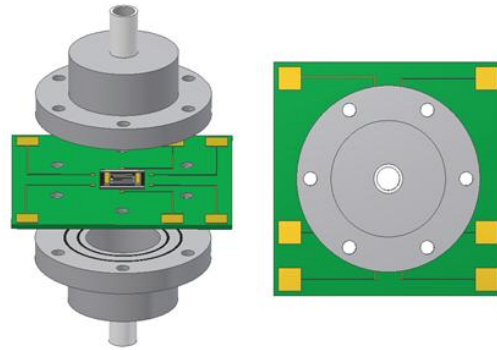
Oil mass fraction sensor on top of PCB board was covered with chamber.
